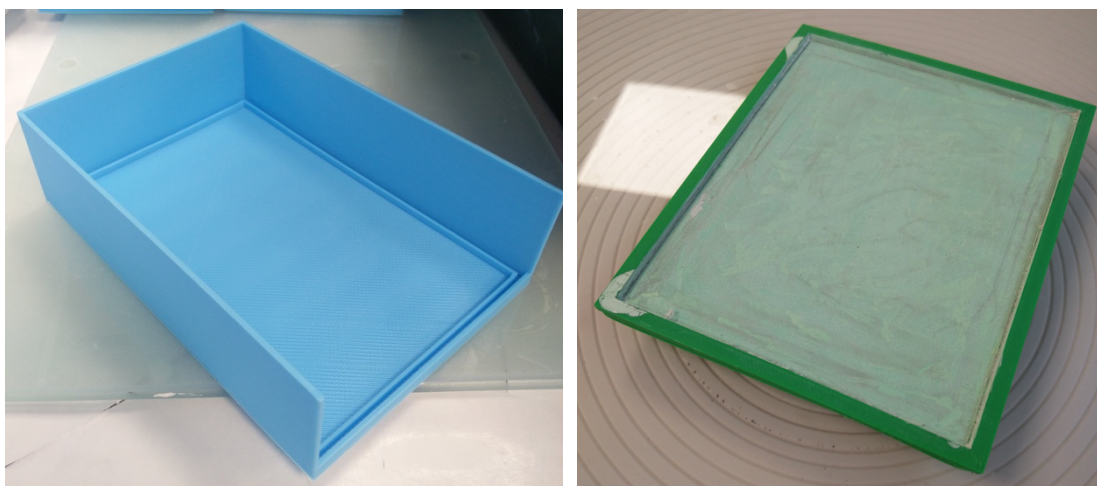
Left: Original mould design used in membrane casting (dimensions: 10 x 20 cm); Right: Improved design in this project (dimensions: 10 x 12 cm).
